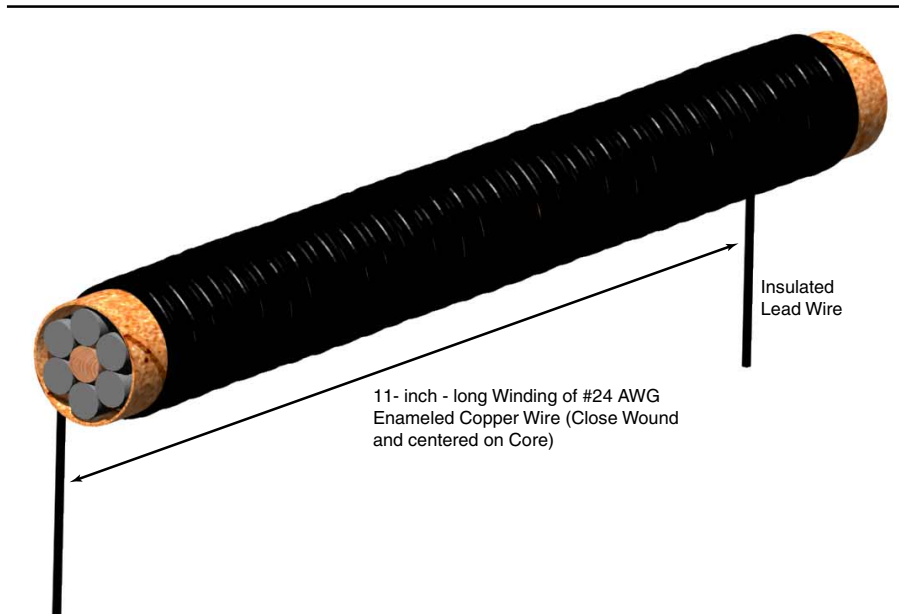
L is an 11-inch-long, close-wound coil of #24 enameled wire on the core bundle. Attach insulated wire leads to the coil ends.
